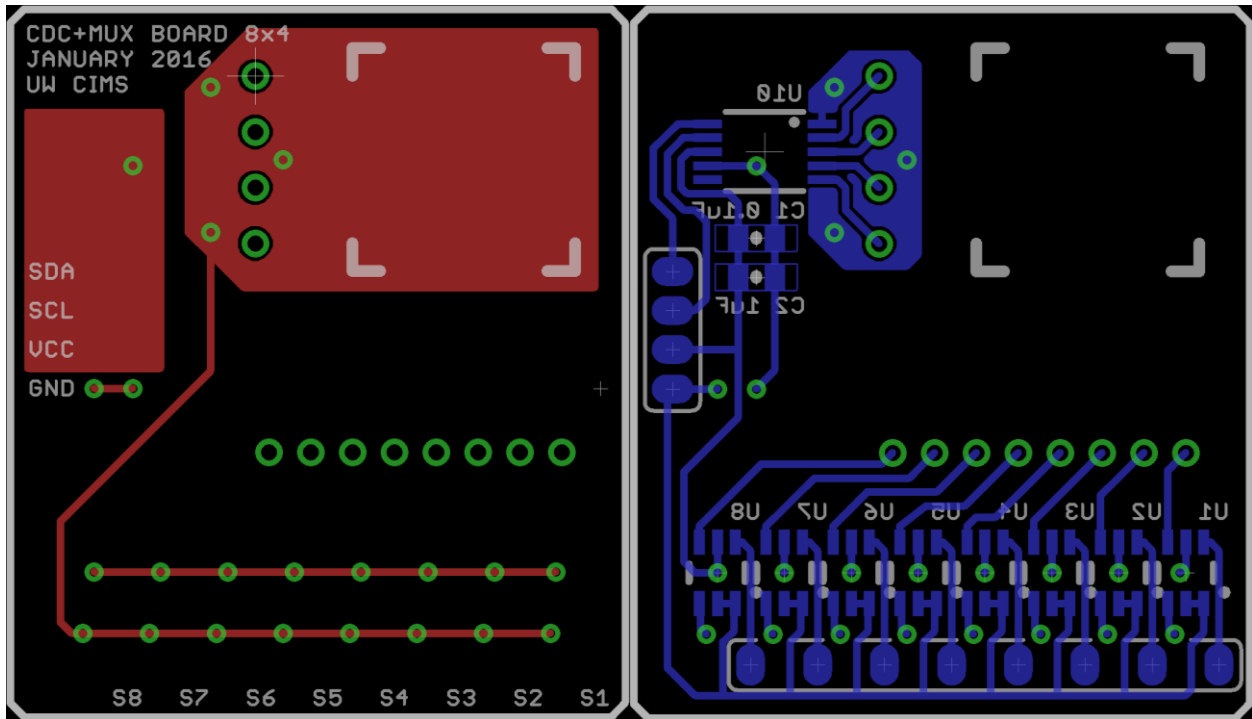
Board layout of CDC + MUX board, top (left) and bottom (right)
